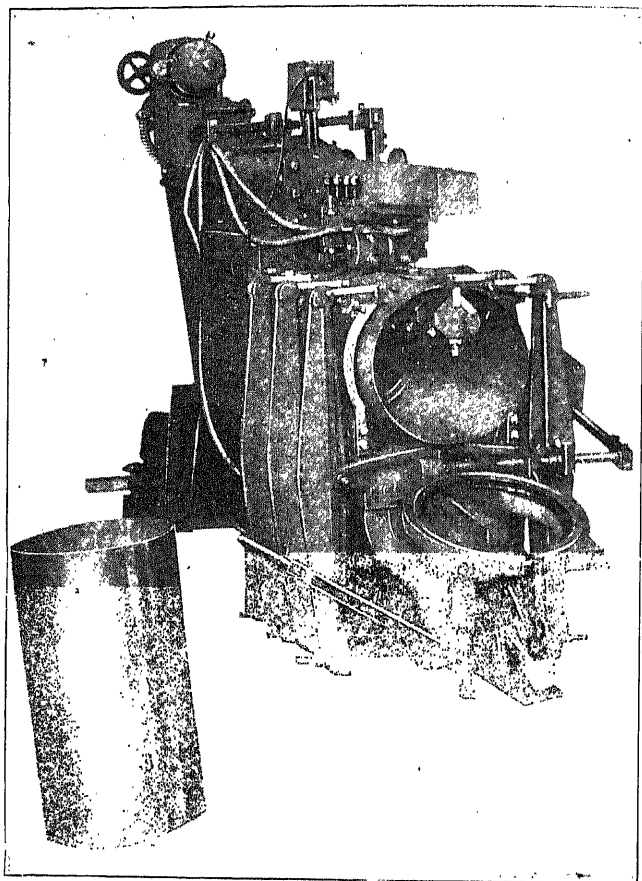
Holding Jig for Large Sheet Metal Cans.
